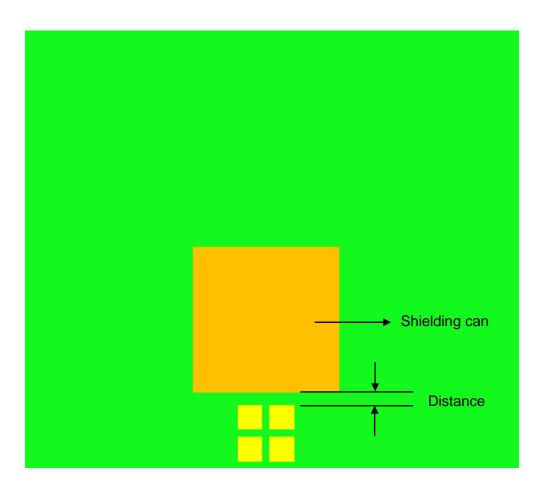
SHIELDING CAN FIXED ON REFERENCE PCB
